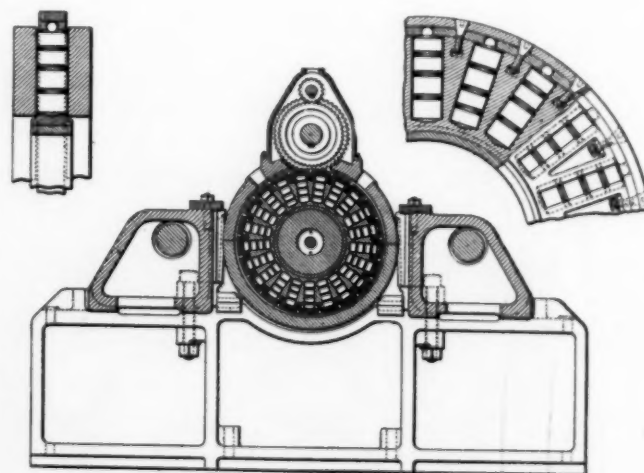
ANNULAR THRUST BEARINGS USED IN THE SLICK WHEEL MILL
